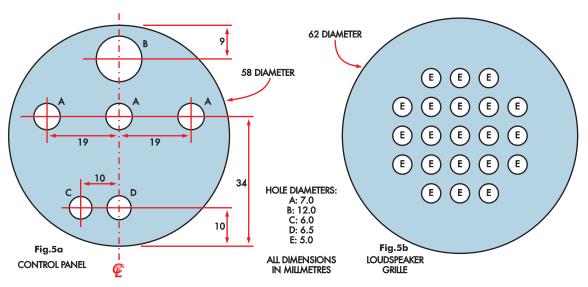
the drilling detail for the front (control) panel (Fig.5a, left) and the rear (speaker baffle) panel (Fig.5b, right). Note that these 1mm aluminium discs are different sizes.
